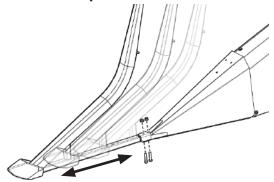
Crop Divider Extension - 3 Possible Positions
